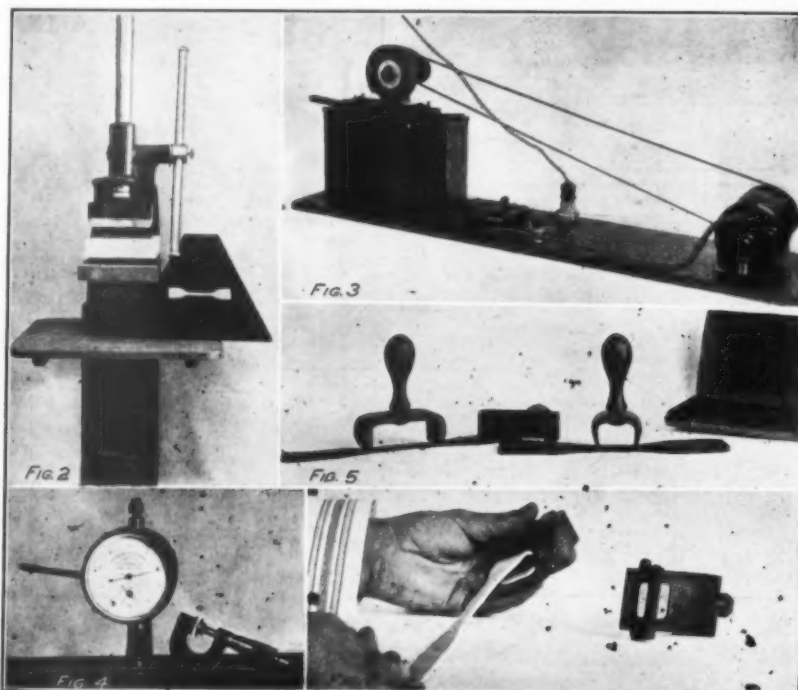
ARBOR PRESS FOR CUTTING TEST PIECES. FIG. 3. BUFFING WHEEL AND ELECTRIC DRIVE. FIG. 4. DIAL AND HAND MICROMETER. FIG. 5. GAGE MARKER (SEE FIG. 1 FOR DETAILS OF CONSTRUCTION). FIG. 6. SPECIAL JAWS FOR PURE GUM TESTS.
